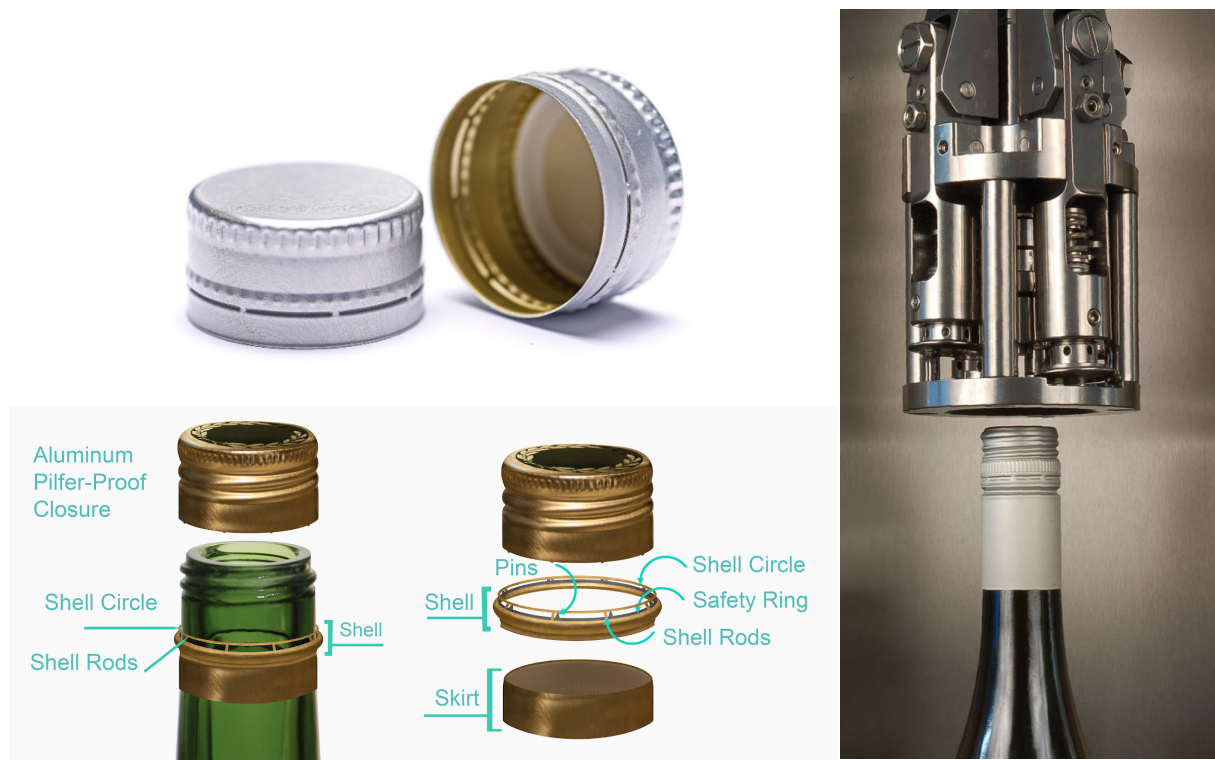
ROPP Cap and its capping machine along with the opening mechanism.
